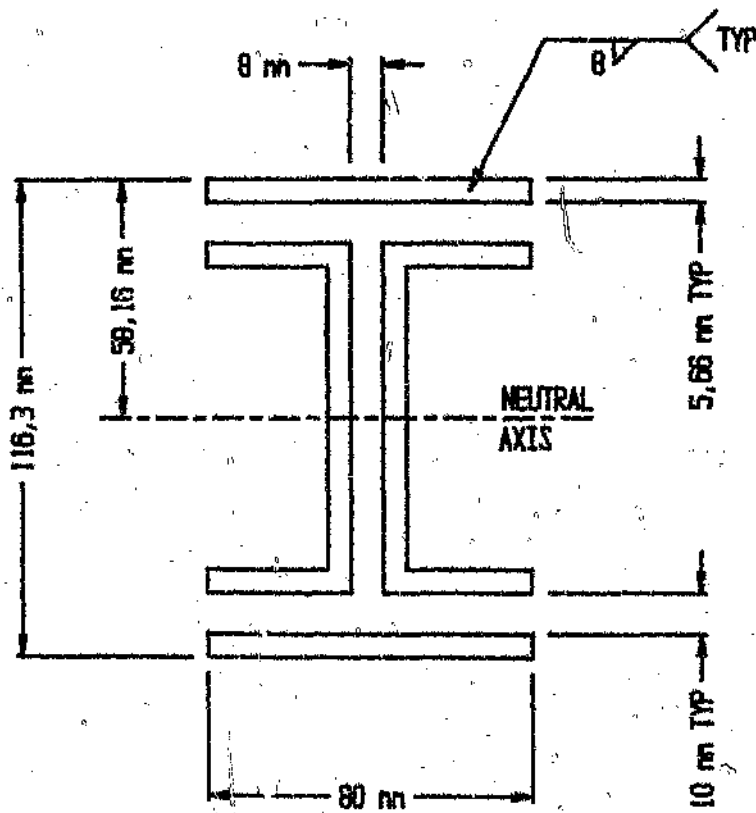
Weld cross section at landing leg cross member flanges
